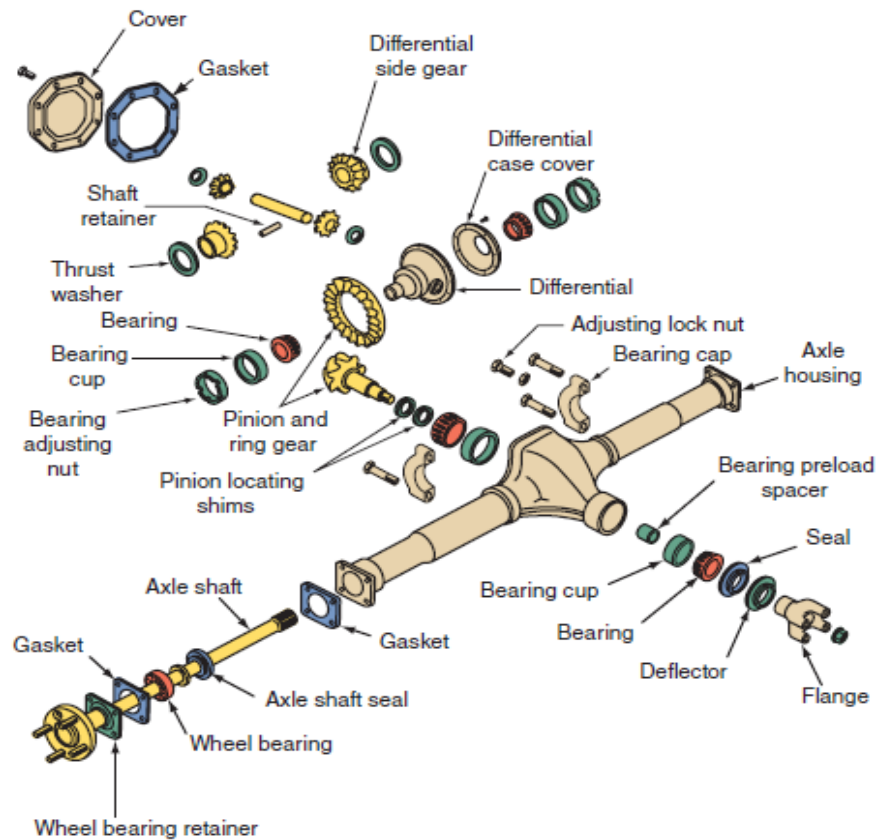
An exploded view of an integral-carrier axle housing with a hypoid final drive assembly and semi-floating axles
